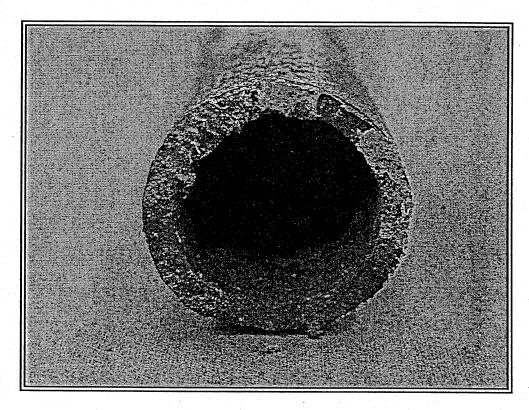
Photograph of the fracture surface on the end of the conduit tube
